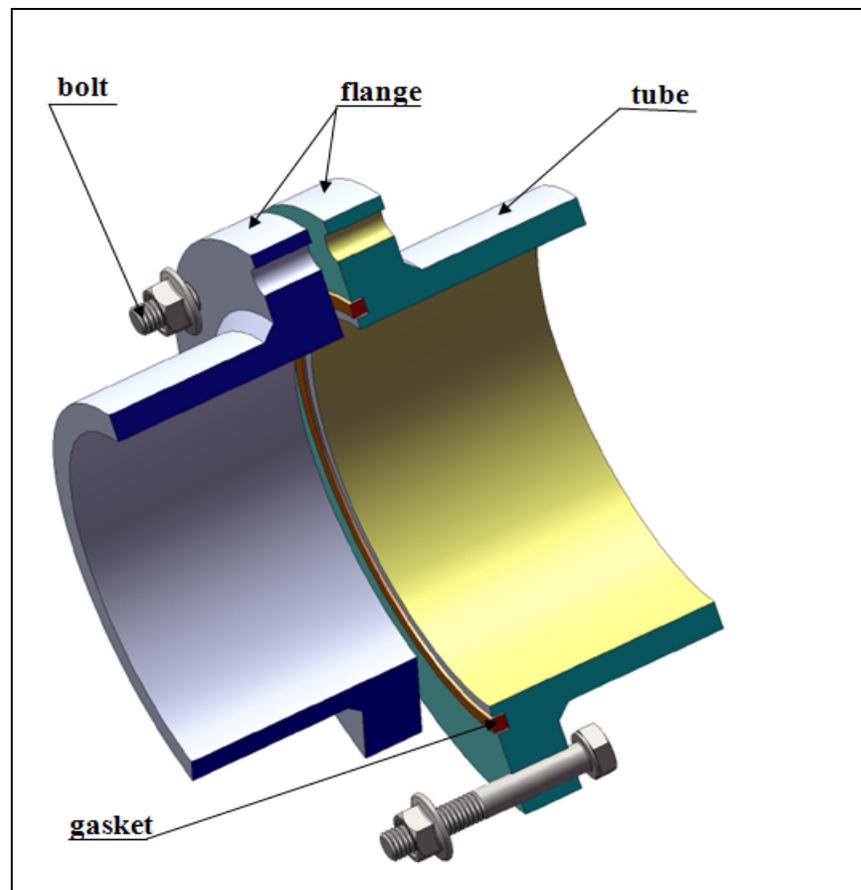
Bolted flange joint – metal-to-metal contact type
